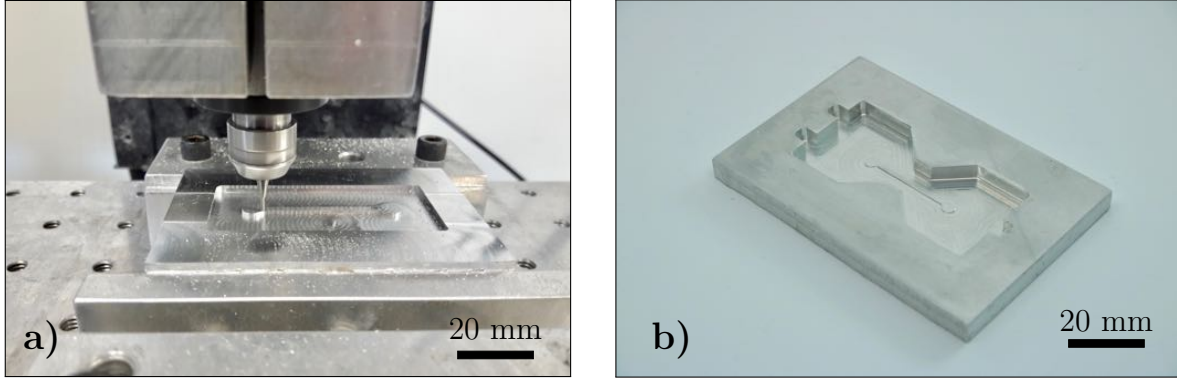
Photographs showing the fabrication of an aluminium microfluidic mould, and the resulting mould. a) The aluminium negative mould being CNC milled out of 60601-T6 aluminium. b) A macro photograph of the completed channel mould. The channel design is a basic linear microfluidic device. The overall bow tie shape of the mould allows for easy electrical interfacing. Tabs are added to the end of the mould as a sacrificial de-moulding tab.
